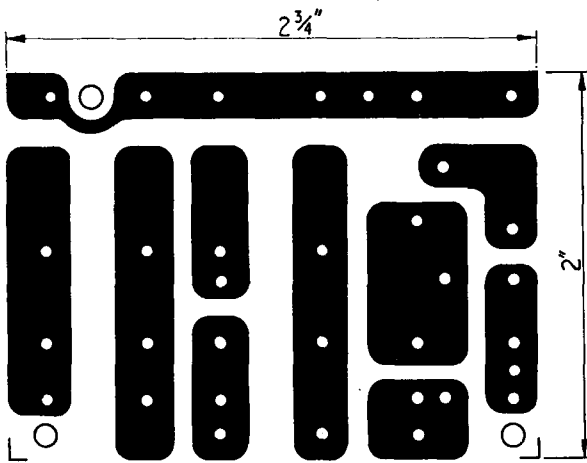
Printed wiring for simple version of the phase shift oscillator
